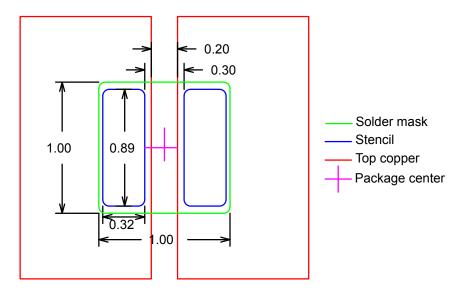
Recommended PCB solder pad layout for L0F2-Bxxx1000xxx1.
